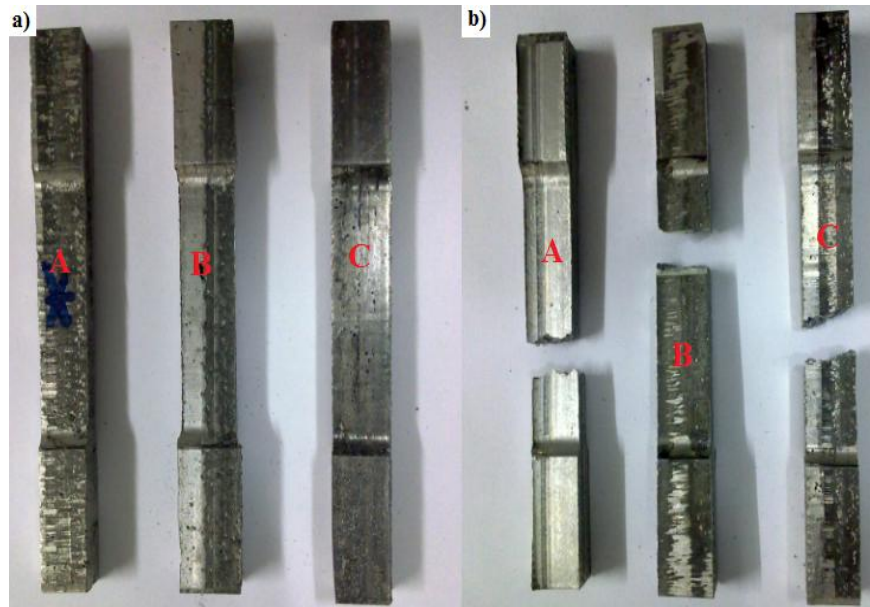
Tensile specimens with 5% TiC particulates, shows a) the specimens before test and b) specimens after failure for sand casting.
